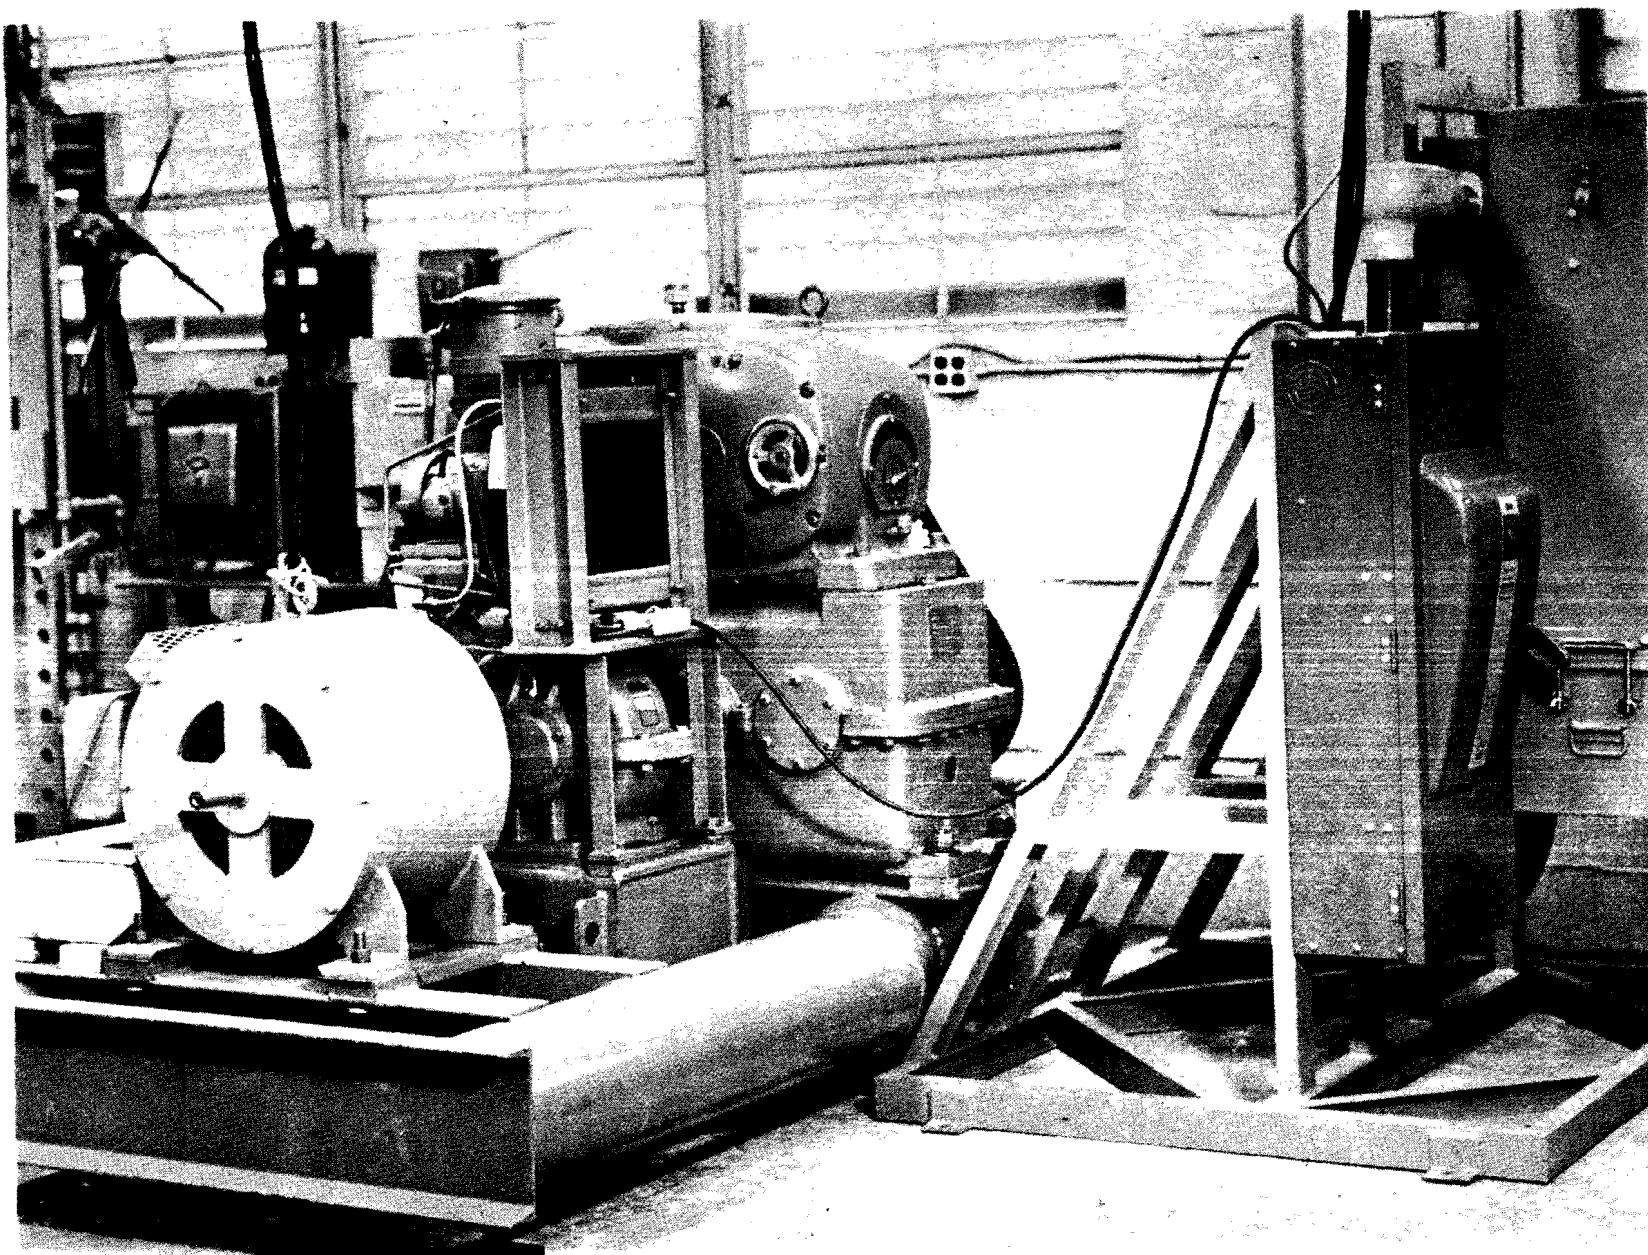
25-kw Motor-Alternator Frequency Converter for 15-kc Ultrasonic Welder
